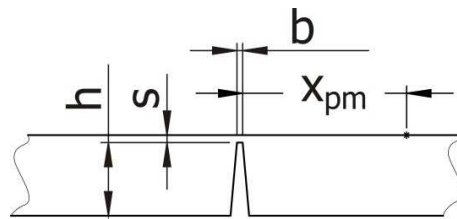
Labyrinth seal dimensions: h – height of the seal tooth, s – gap between the tooth tip and the housing, b – width of the tooth tip, x_{pm} – axial distance between the fin edge and the place of static pressure measurement (defining the operational pressure ratio π). Dimension value: $h = 10$ mm, $s = 0.5$ – 1.5 mm, $b = 0.8$ mm, $x_{pm} = 22.4$ mm.
